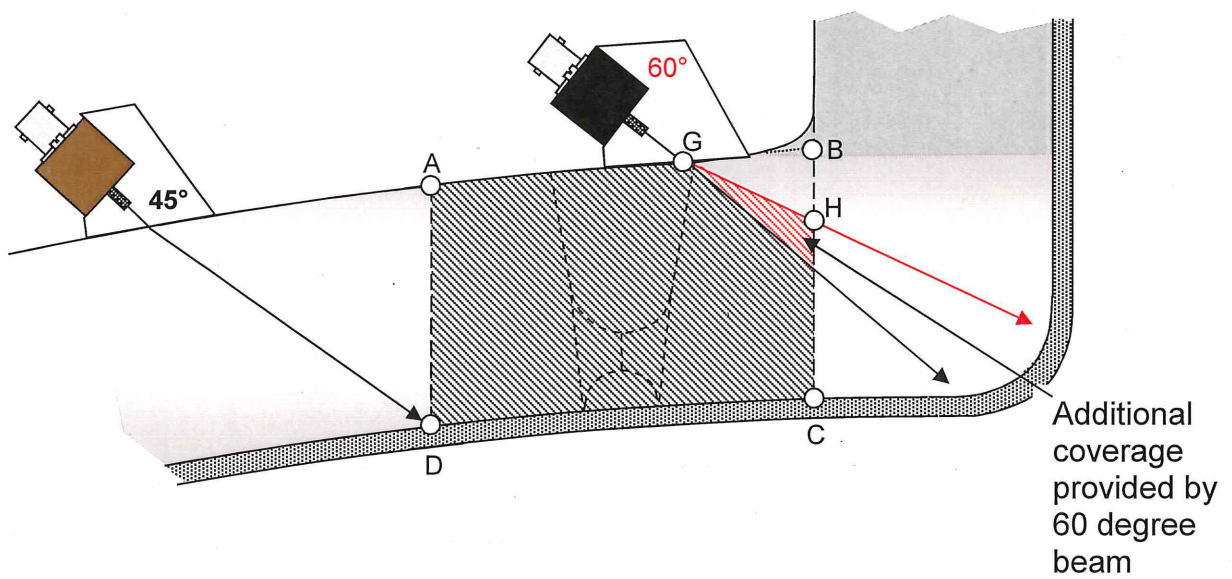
WIB-358 (RV-8010C Nozzle, Top Head) - Weld Configuration and Exam Area
